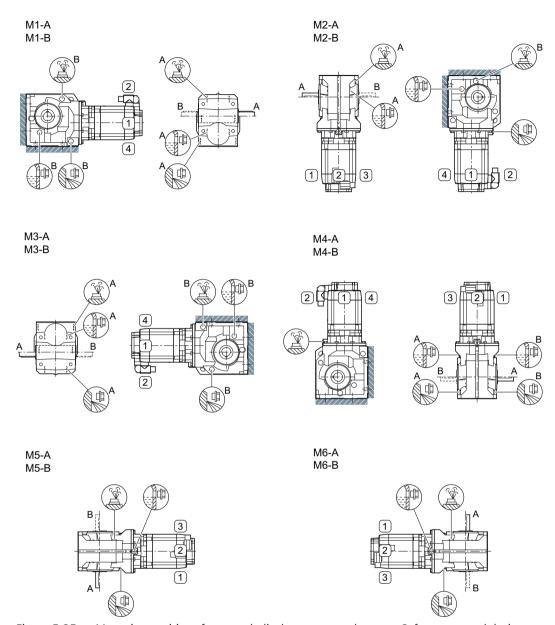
Mounting positions for servo helical worm geared motors C, foot-mounted design, frame sizes 49 - 89, 2 stage
